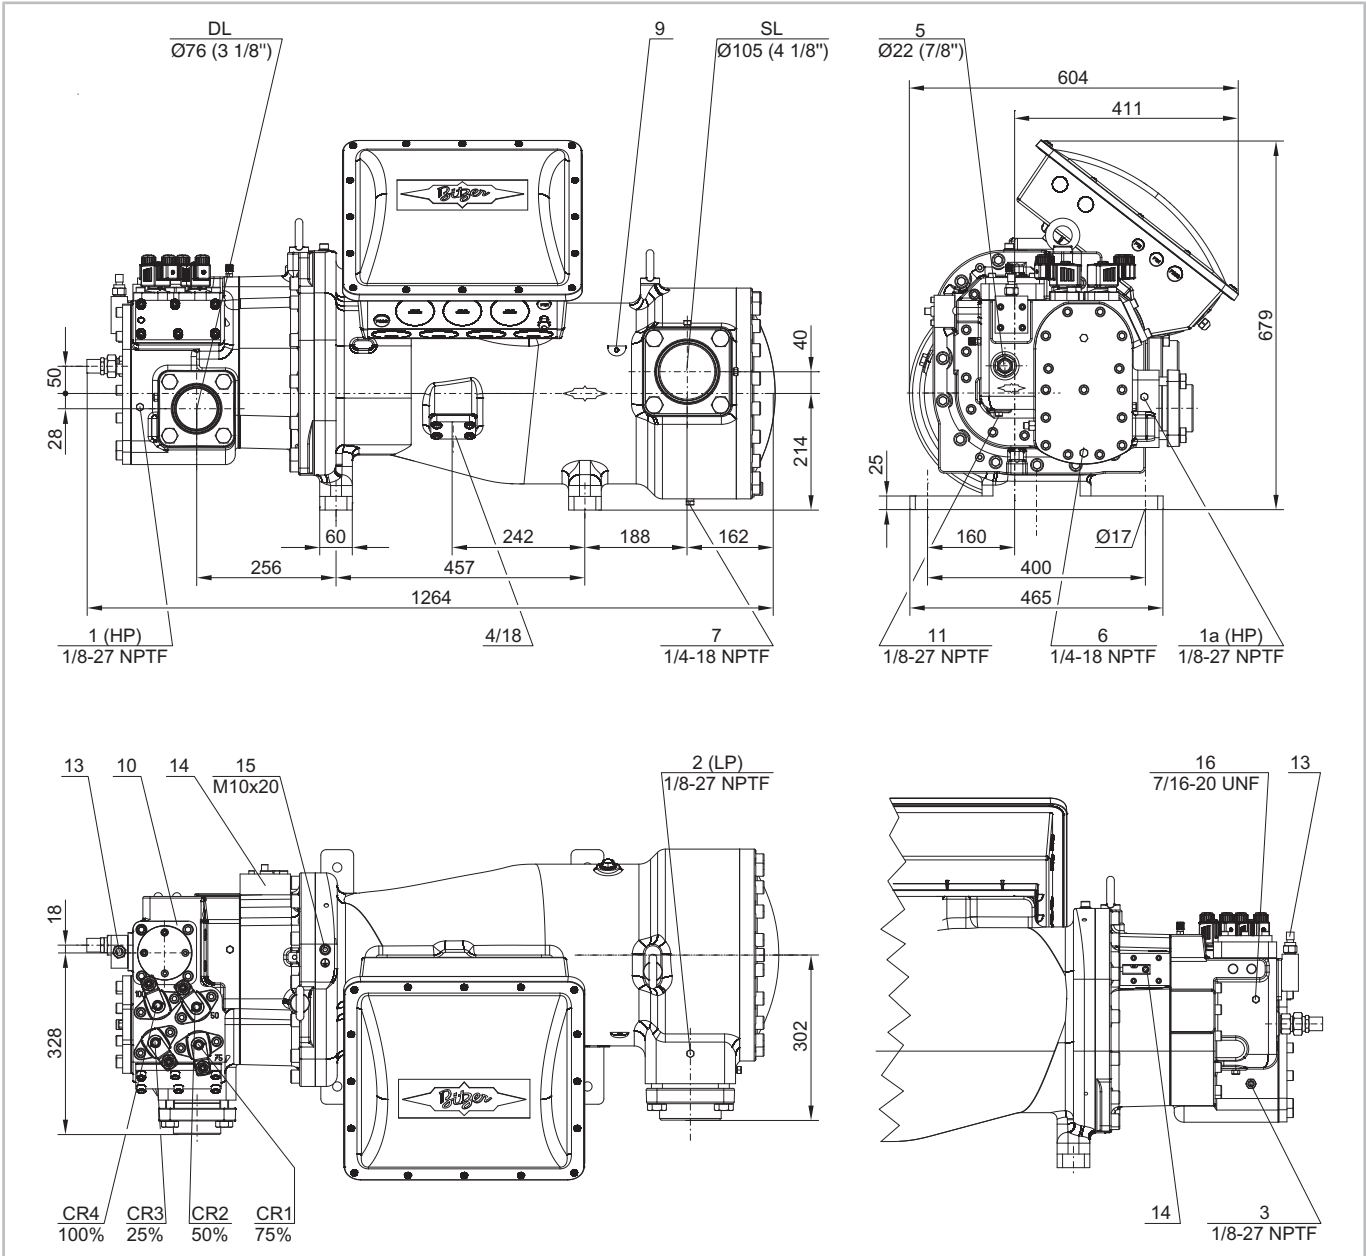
Dimensional drawing HS.8581 and HS.8591
